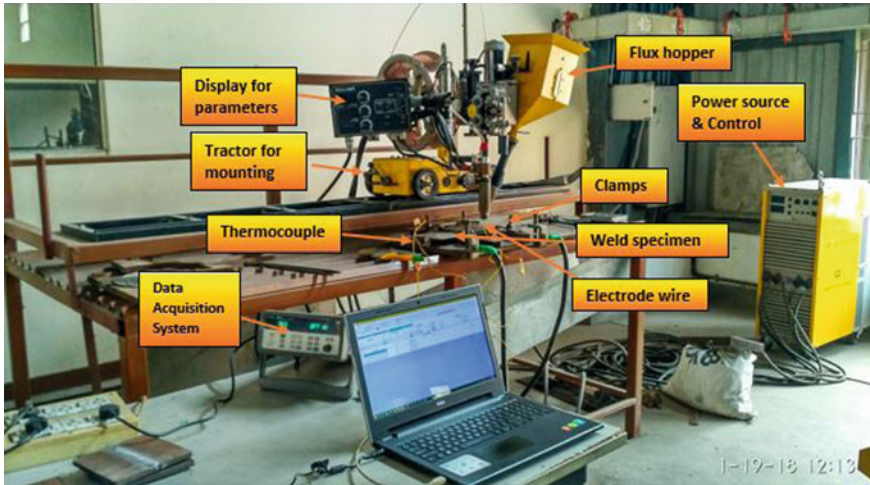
Submerged arc welding setup with thermocouple attachments
